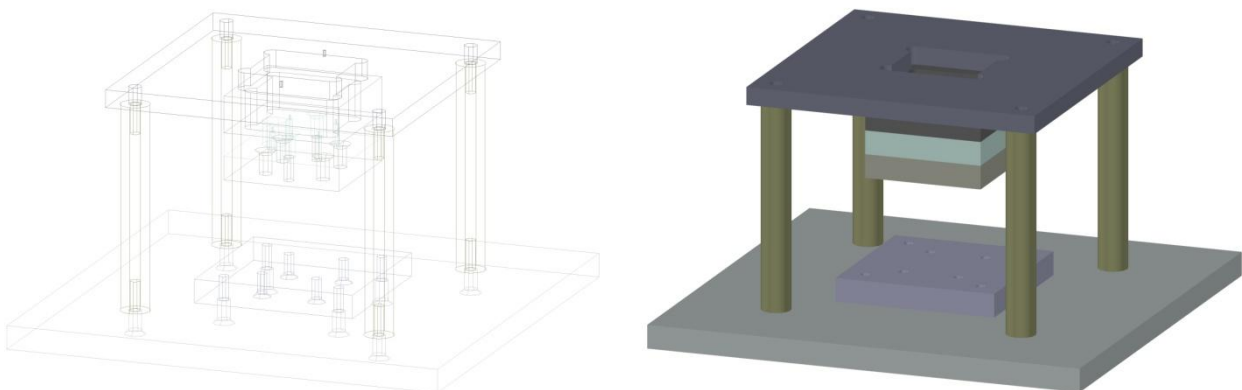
LEFT: 3D AutoCAD drawing of the shim tool. The micrometer screws were not implemented. RIGHT: Rendered version of Andre Breams AutoCAD drawing made by the author.
